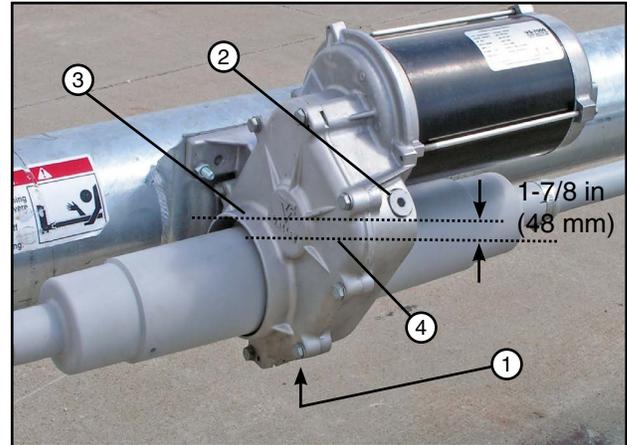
1. Drain Plug 2. Fill Plug 3. Oil Level 4. Bottom of Fill Plug Hole
